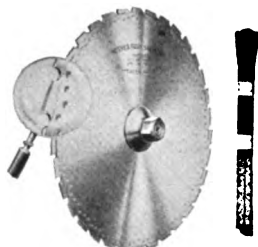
INSERTED TOOTH MILLING SAW Coarse Pitch Type
